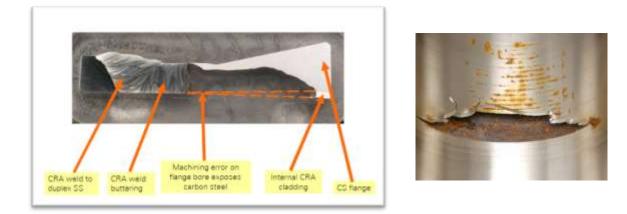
Corrosion of a weld overlay clad flange resulting from poor weld preparation
